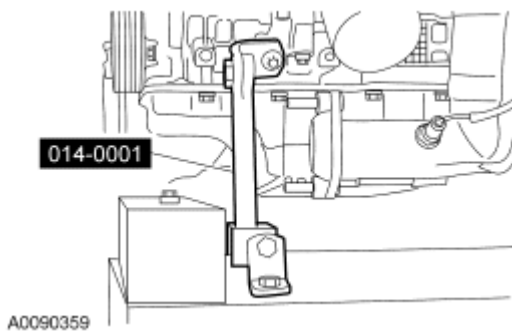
Securing Engine & Transaxle To Powertrain Lift Using Special Tool (014-0001)
